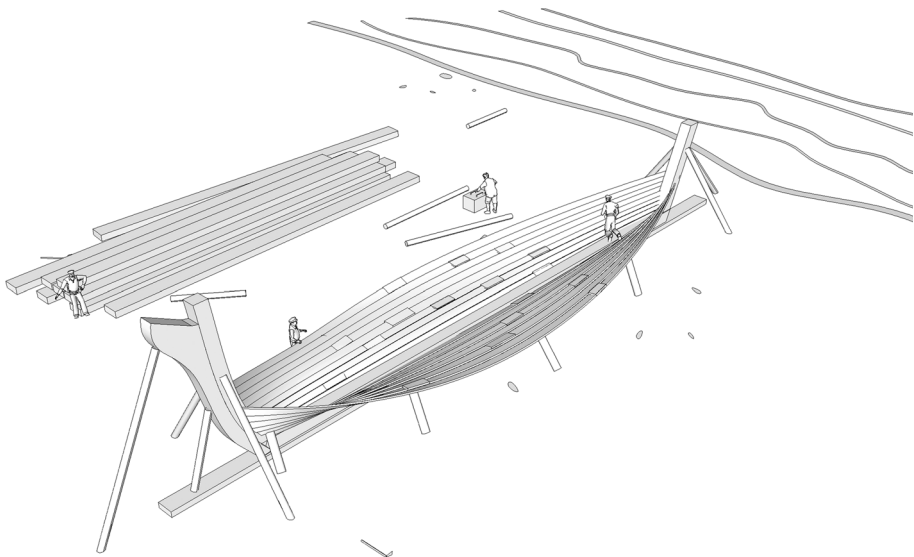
Constructing the clinker bottom. Ditta (2013)
